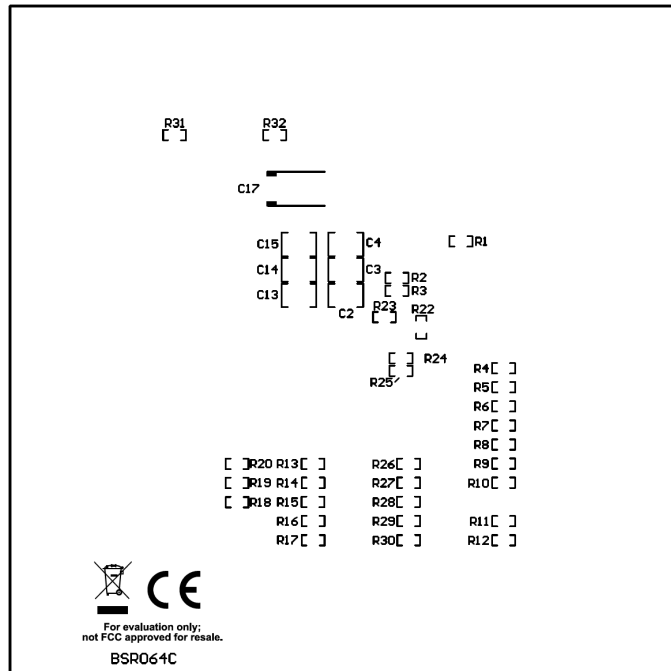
Bottom-Side Component Layout (Bottom View)
